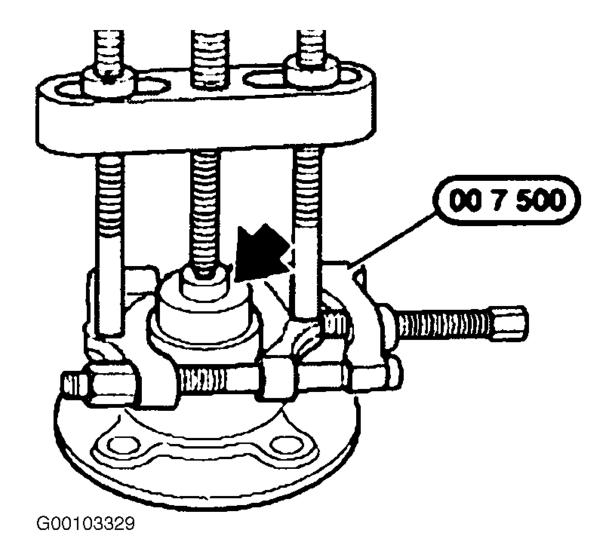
Pulling Off Bearing Inner Race Courtesy of BMW OF NORTH AMERICA, INC.
